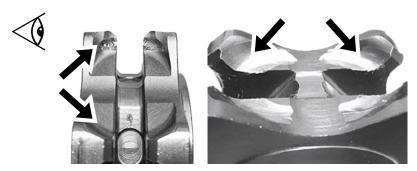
Examples: chain sprocket wear (left) and return sprocket wear (right)
